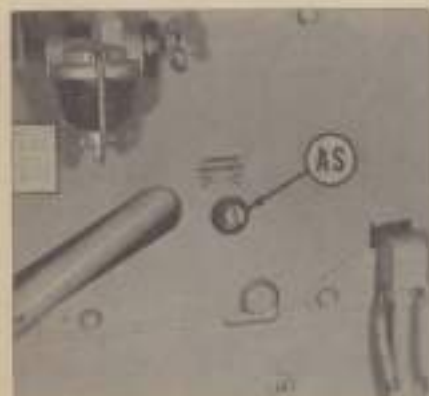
Adjusting screw for late type "lift-lower" linkage. Refer to paragraph 244.
